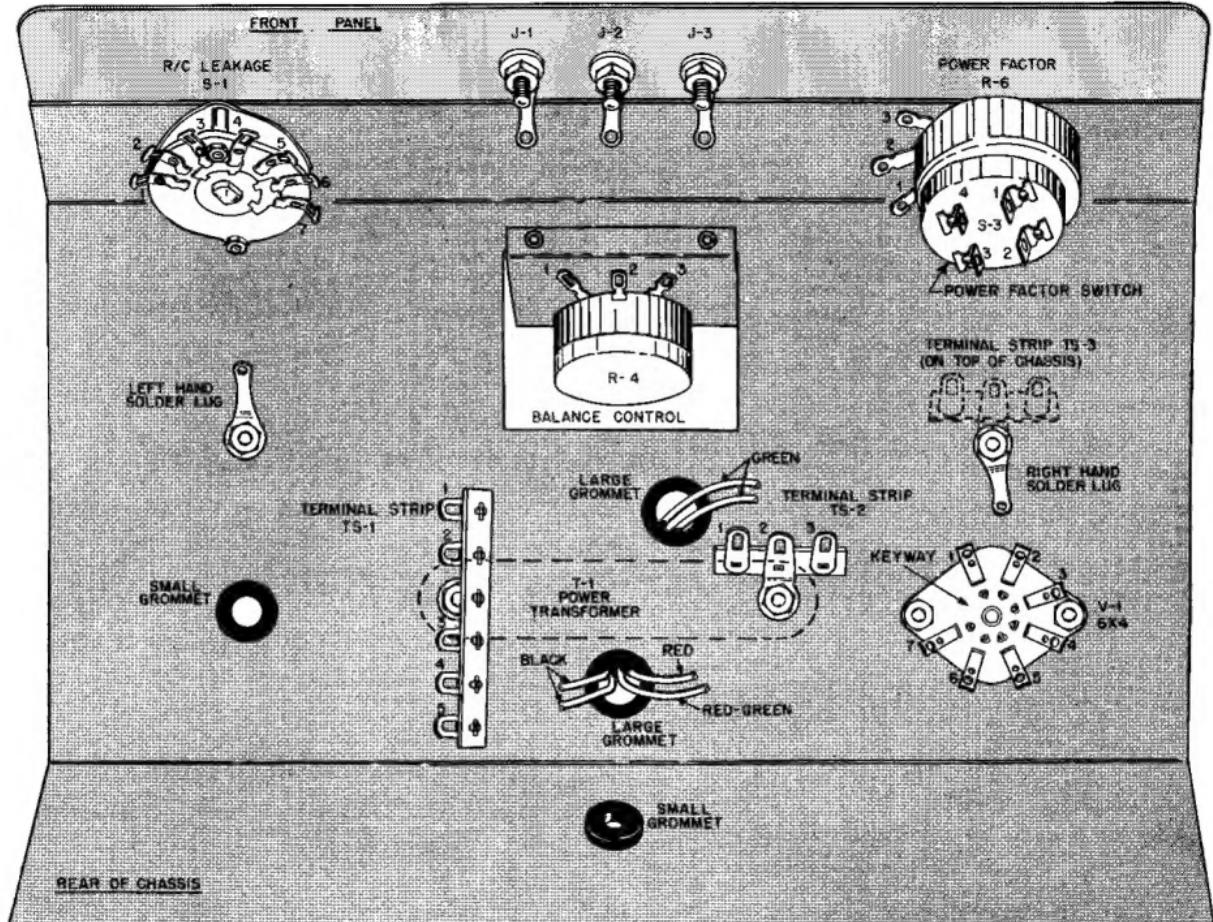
MOUNTING THE PARTS ON THE CHASSIS
